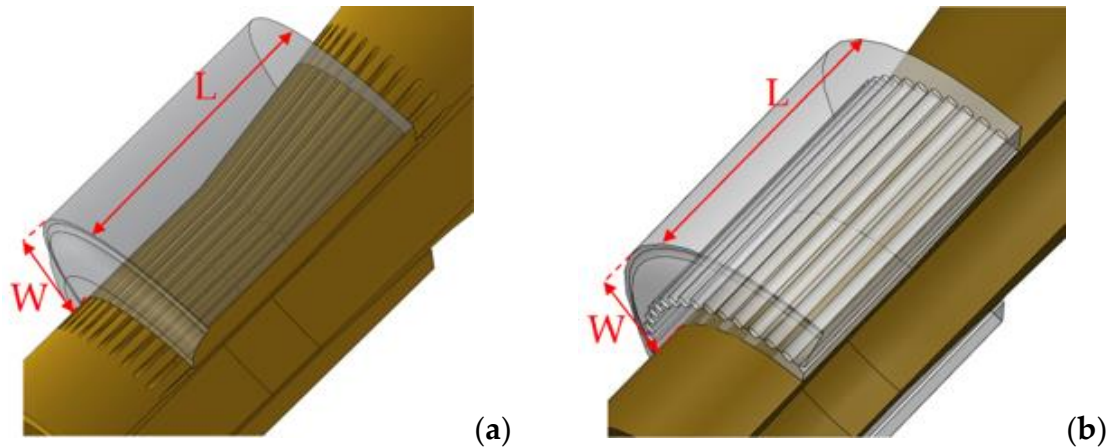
Cavity mock-ups equipped with mini-channel (MC): (a) copper cavity with a zoomed-in view showing the mini-channel cross section; (b) nylon cavity.
